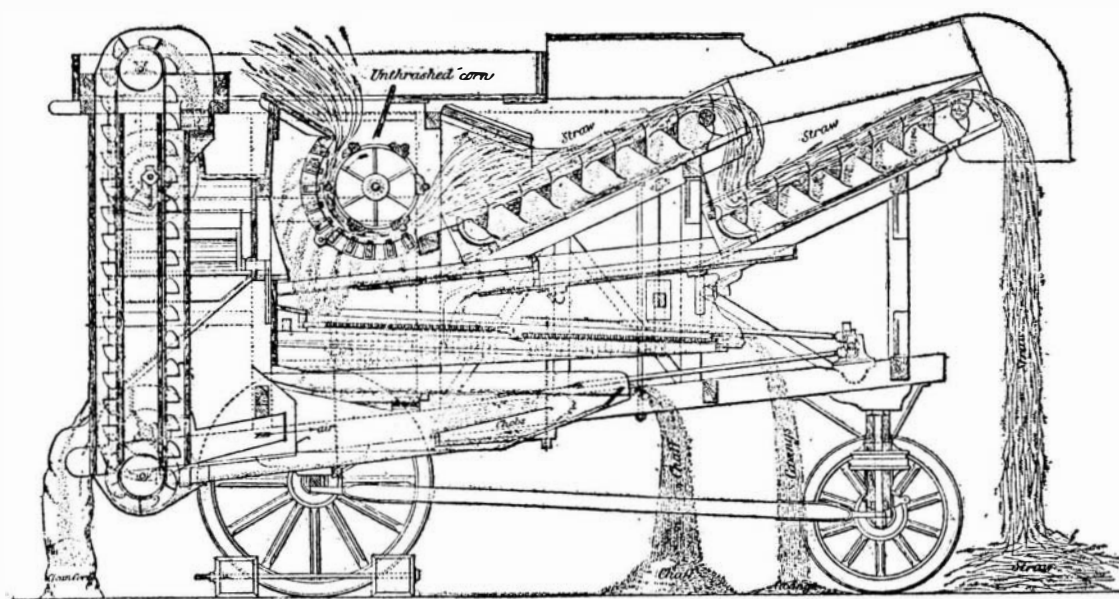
THRASHING MACHINES AT THE VIENNA EXPOSITION.
